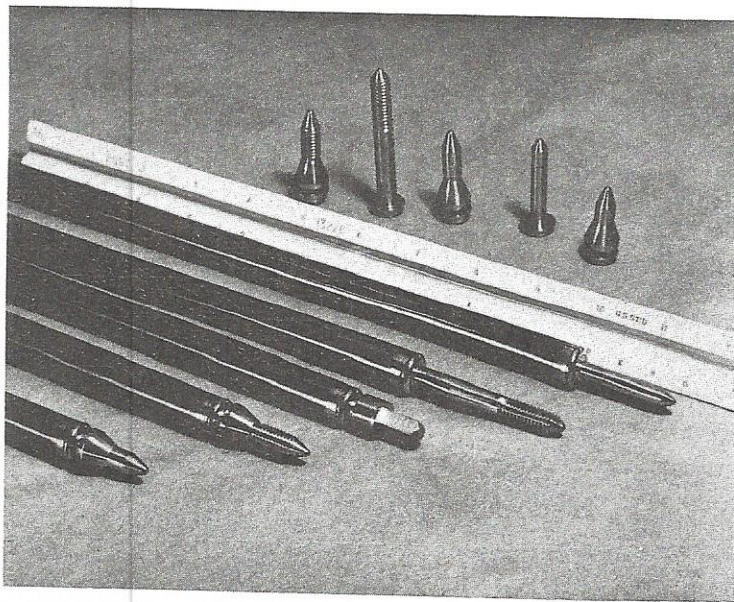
Typical End Plugs and Welded Tube Ends
